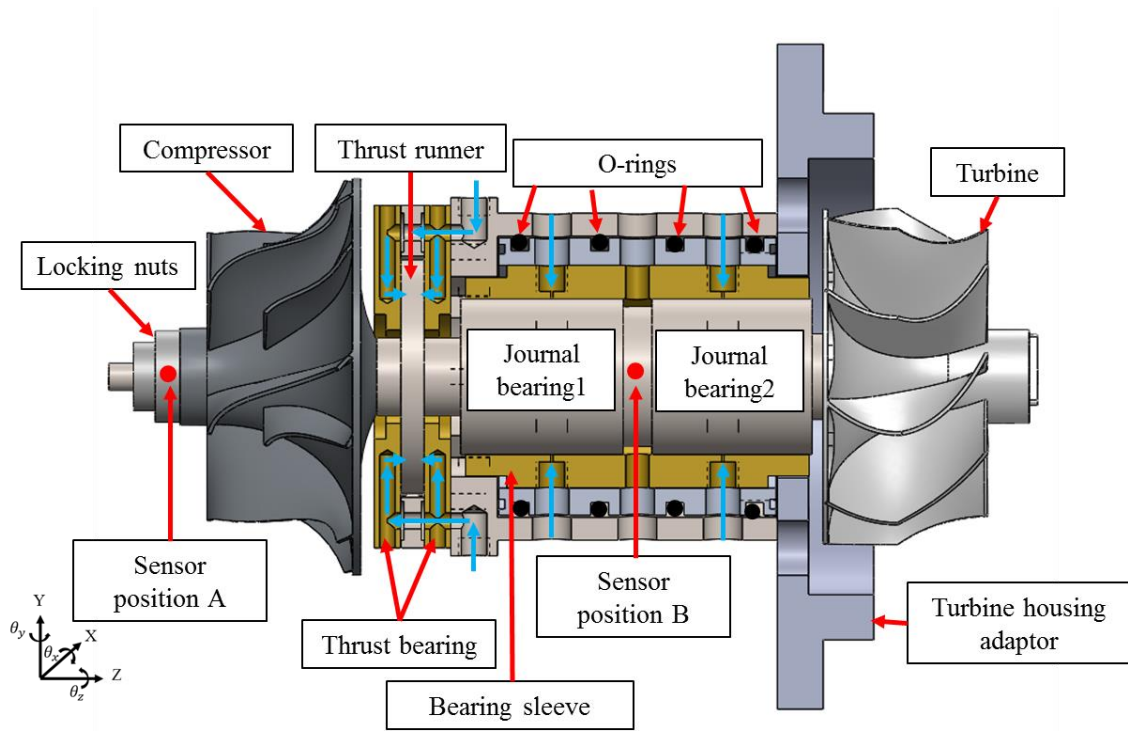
Cross-section view of prototype hydrostatic bearing test rig
